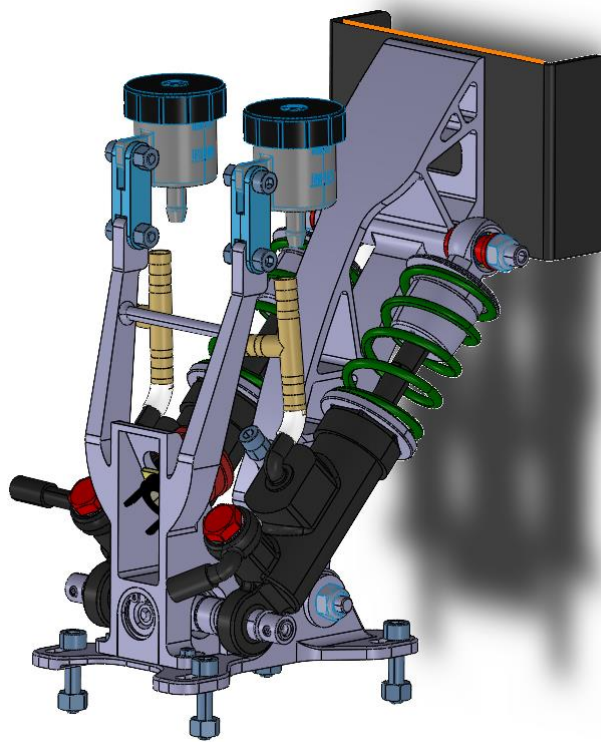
brake pedal assembly with two master cylinders and a balance bar
